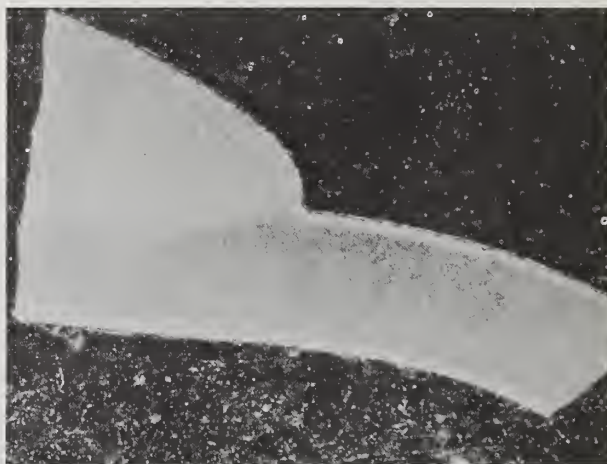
Cross section of the tubing and weld of figure 19 showing decarburation (light-etching material near the surface).
